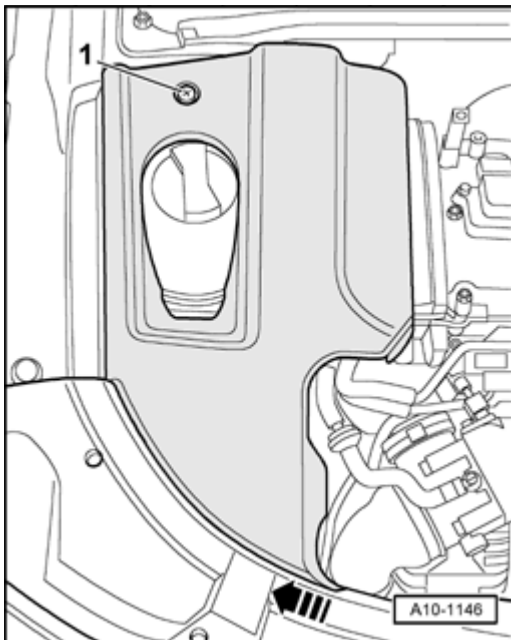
Removing Screw And Coolant Expansion Tank Cover
